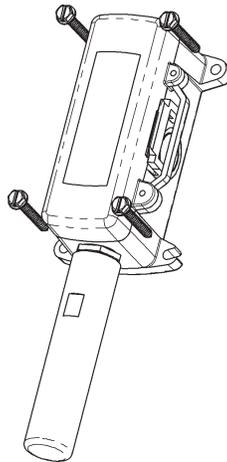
Hanging Bracket, 1" Buffer w/Plastic Threaded Fitting
